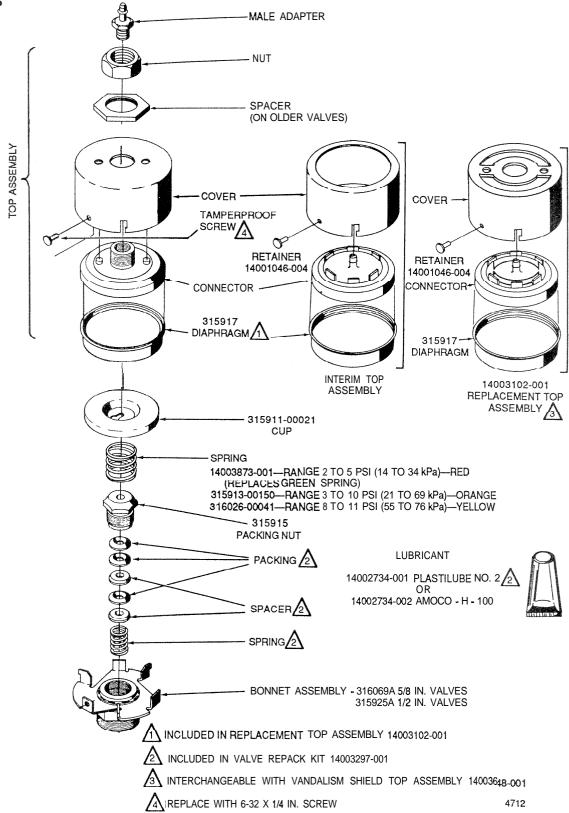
Exploded View of Series 1 and 2 VP526A Valve Packing and Top.
